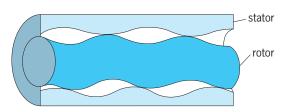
Rotor and stator for pumps operating to form a progressing cavity.
